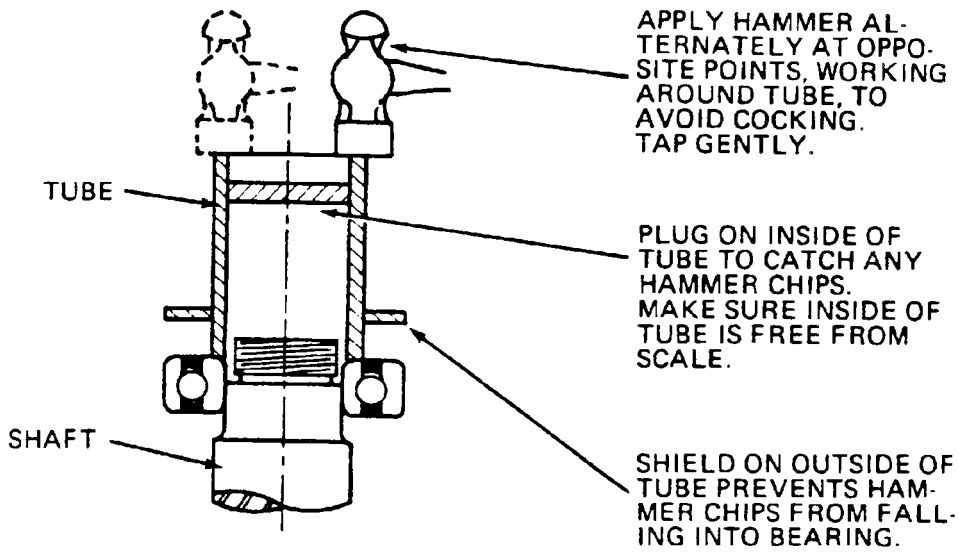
Hammer Mounting - Use in Emergencies Only
